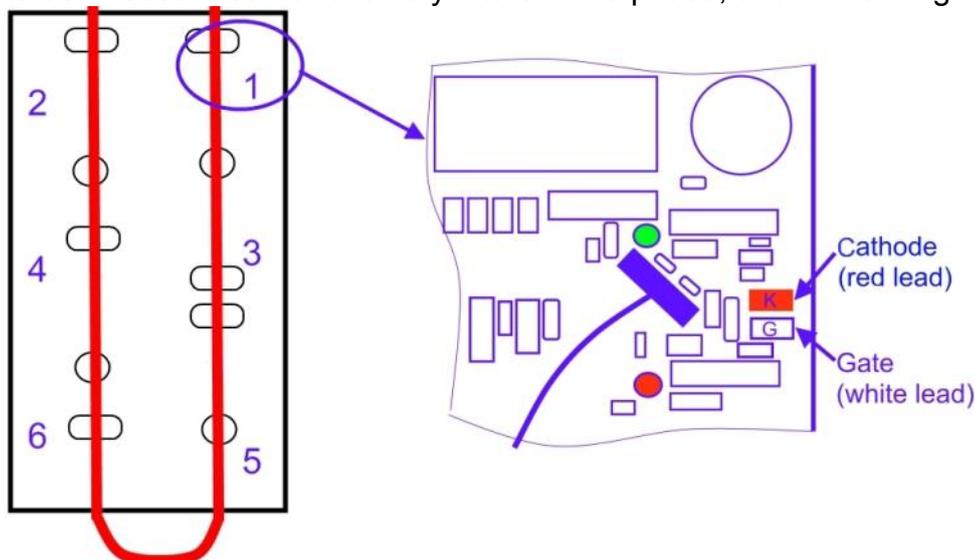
Firing PCB – SCR#1 Gate-Cathode Testing
